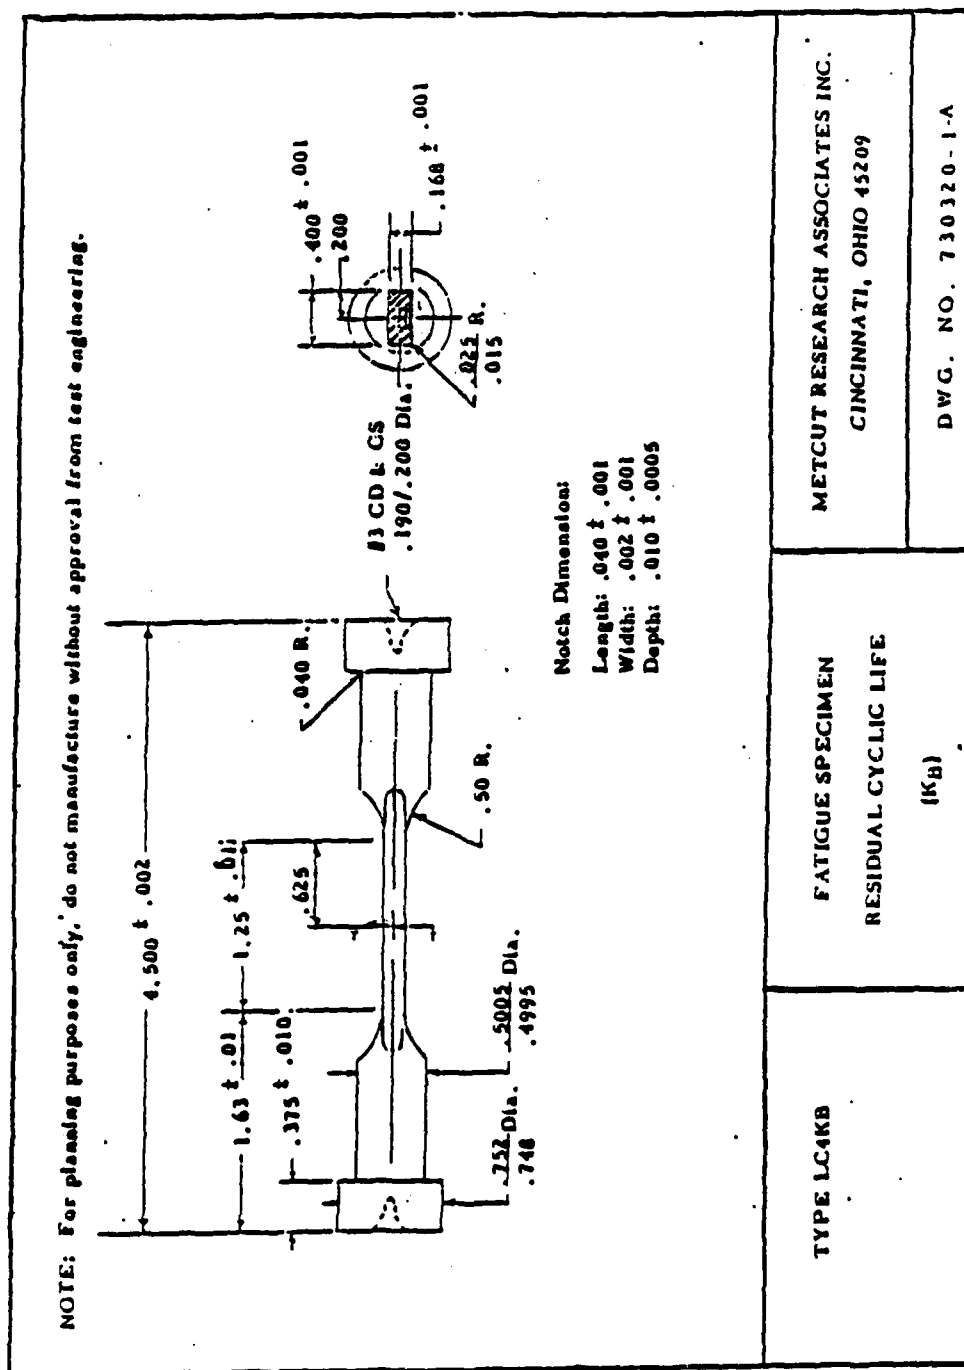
Fatigue Crack Growth Test Specimen Sketch
